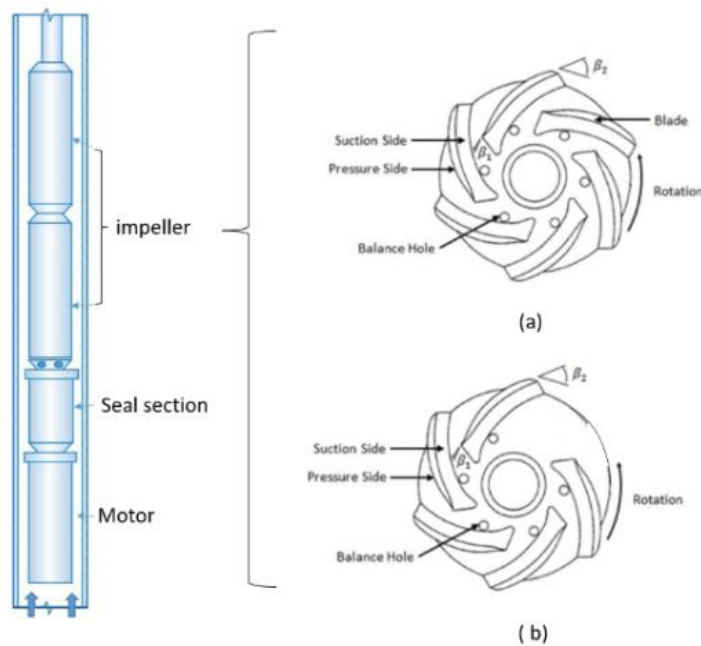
Downhole submersible parts of (a) healthy impeller and (b) broken impeller [15]
